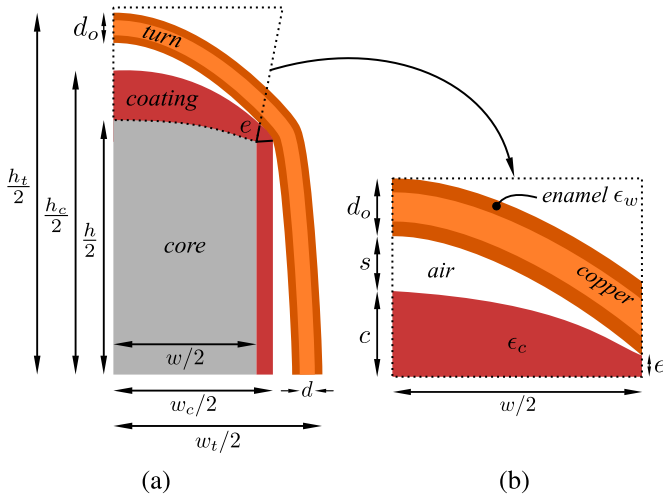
Close-up on a quarter of section. (a) Quarter of section B from Fig. 3(b) with measured dimensions. (b) Details of the top face from the core surface with deduced dimensions.
